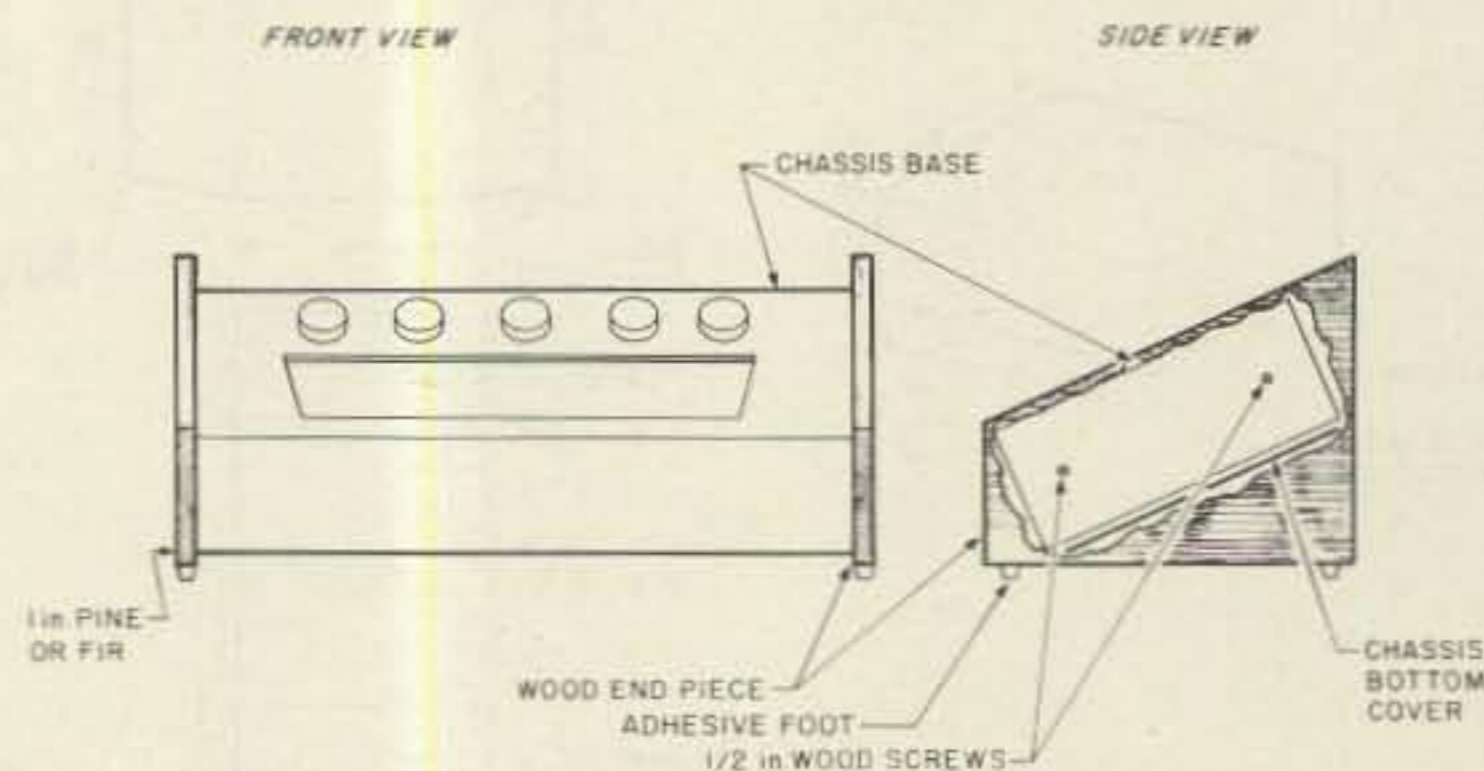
A hybrid cabinet using a chassis base with wood end pieces.
